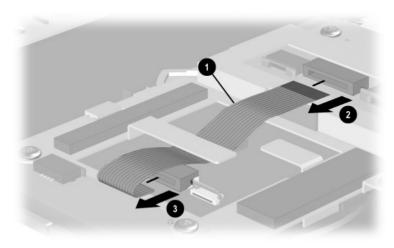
Removing the TouchPad-to-TouchButton Board Cable
